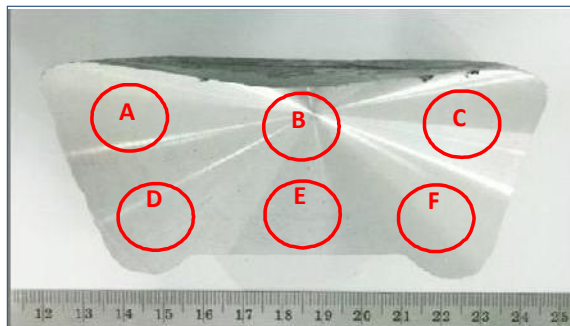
The fracture surface of AD12.1 ingot.
